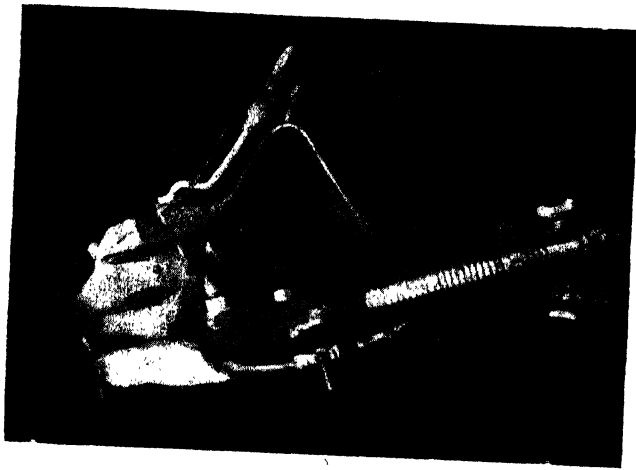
Early Horizontal Type Molten Metal Pistol.
